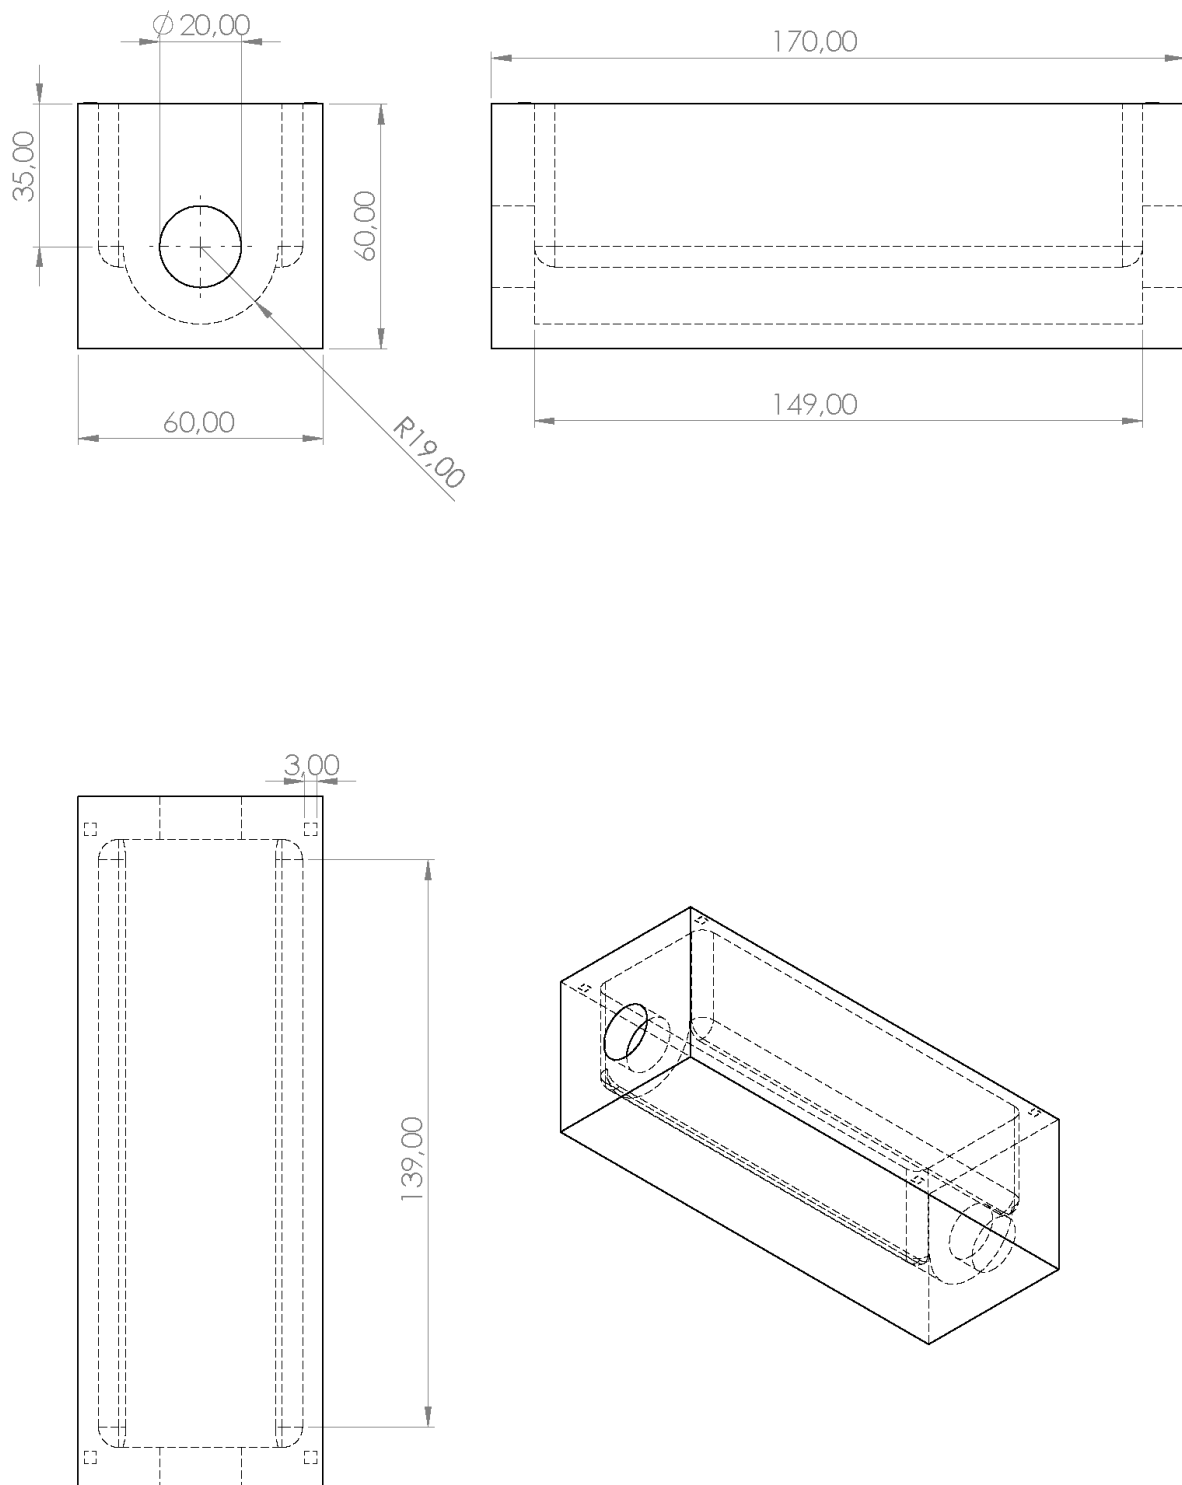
Views of the final culture chamber: front view (top left), side view (top right), top view (bottom left), isometric view (bottom right). Measures in mm.
